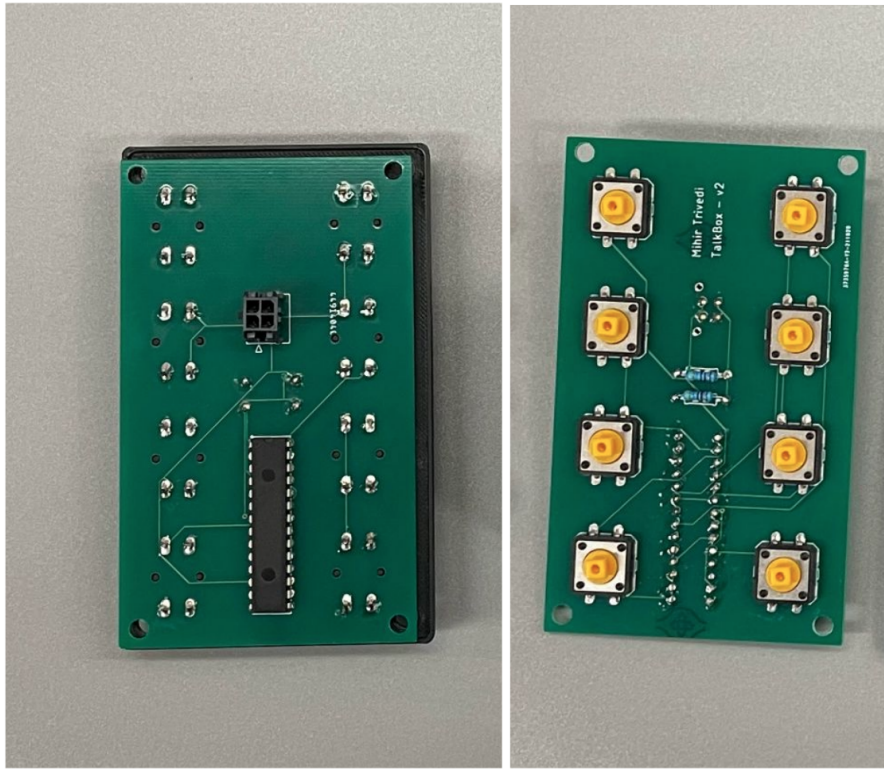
Manufactured PCBs after component soldering, bottom (left) and top (right).
